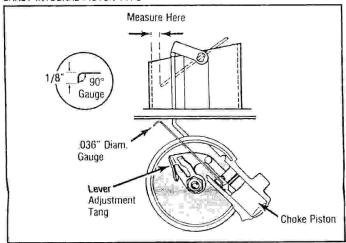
Choke Pull Down Adjustment (Early Integral Piston Type)
